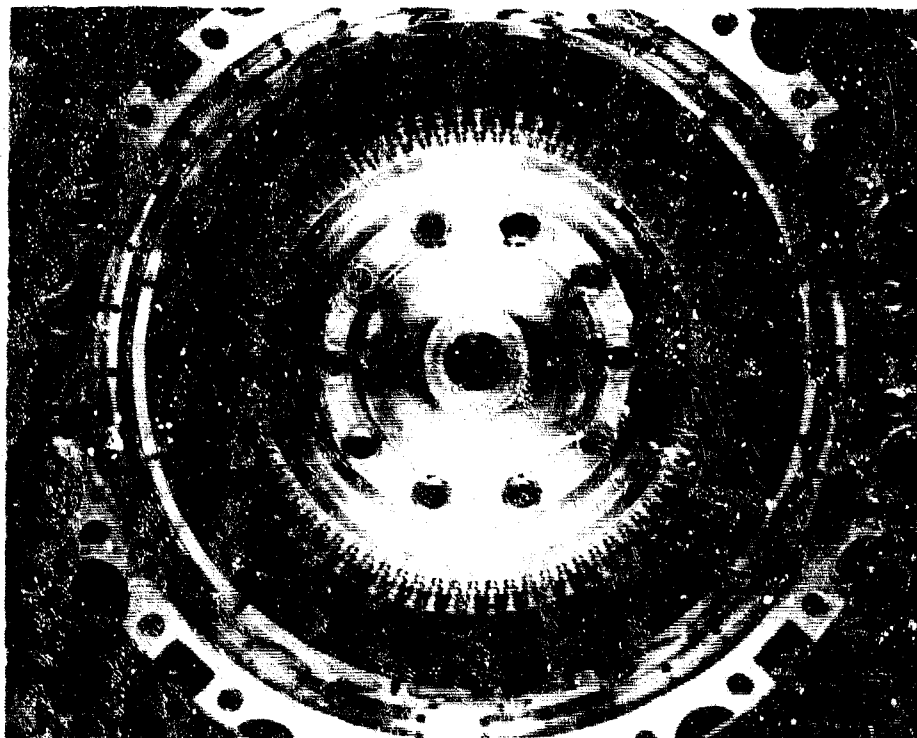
Disassembly View of Fuel Turbine Showing Distorted Tip Shroud and Turbine Blade Dents
